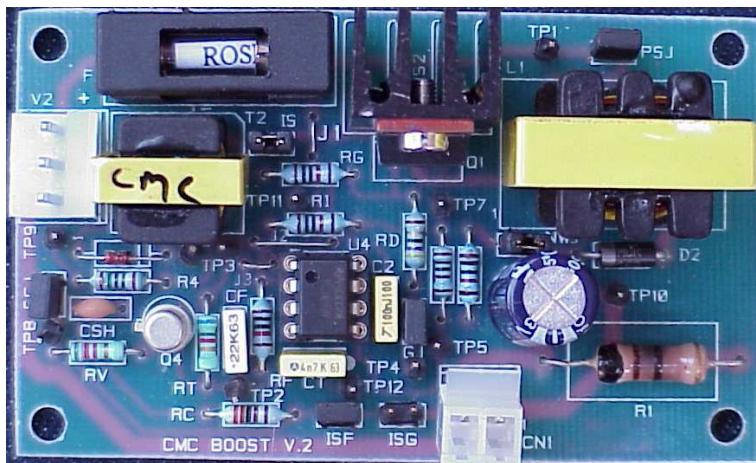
Mounted PCB Board of the CMC-Boost Converter
